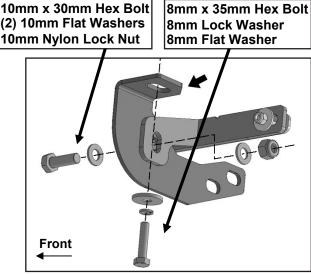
Passenger/right #2 Mounting and Support Brackets.
